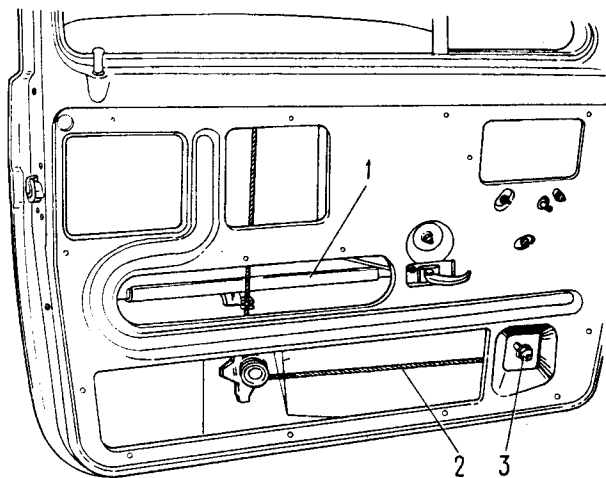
Adjusting Window Regulator Cable Tension:
